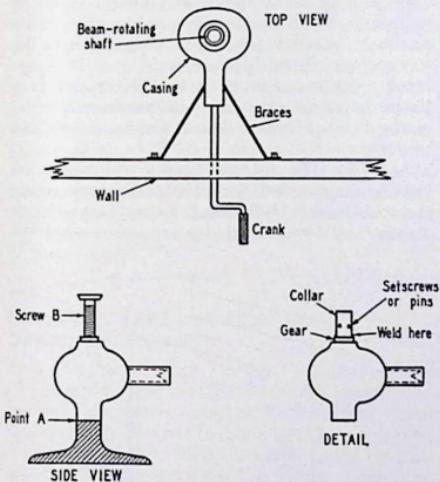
Here's the novel beam-rotating gadget used at W1OPW. Made entirely of junk parts, it can be assembled and installed in a few hours.
